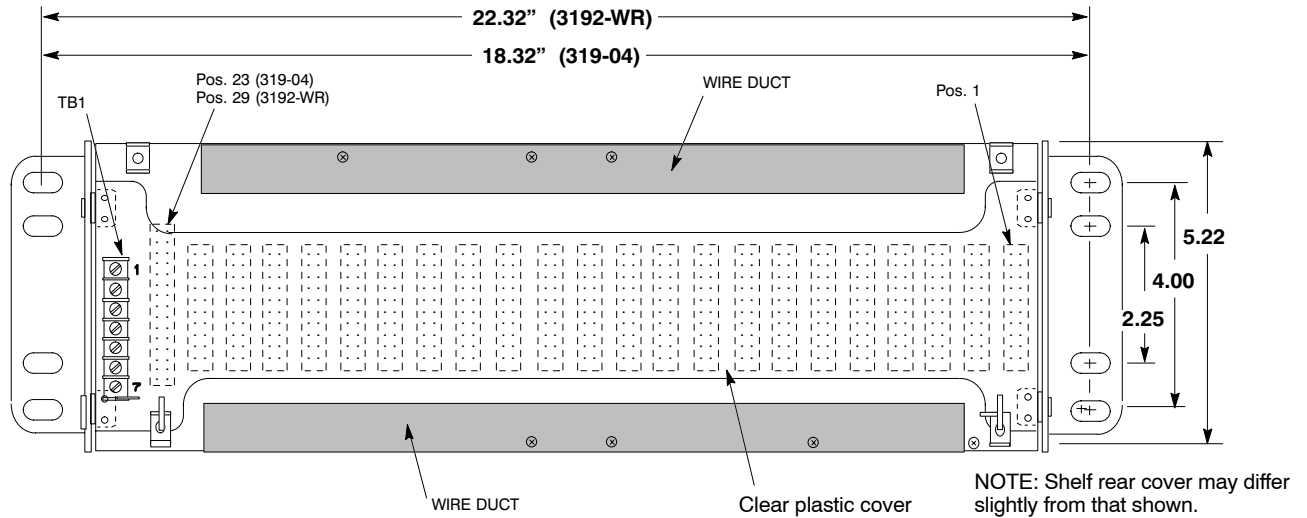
319-04 19-Inch Wirewrap Mounting Shelf and 3192-WR 23-Inch Wirewrap Mounting Shelf, Rear View
